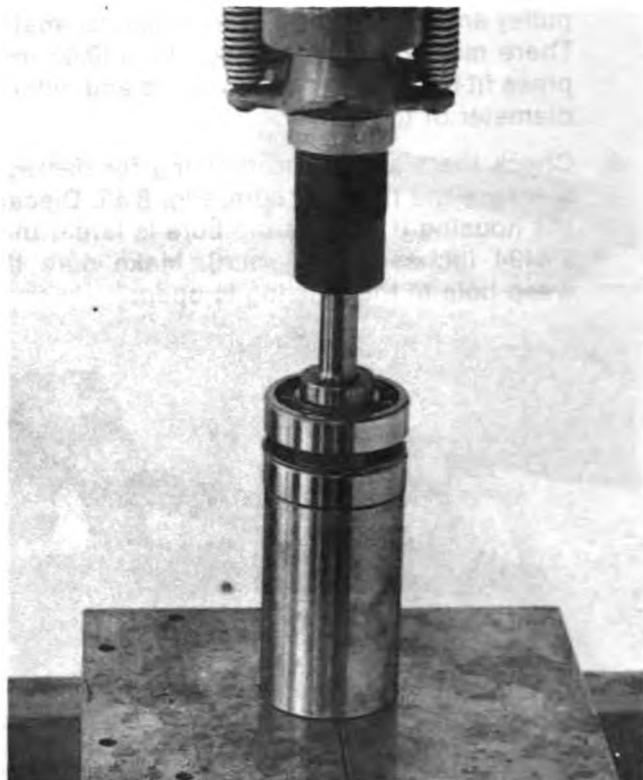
(N10886). Install The Bearing Onto The Shaft.
